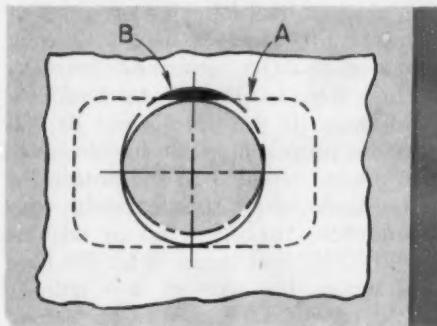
Familiarity with technique involved in machining this part would have suggested to the designer that either the hole should be smaller or the cored opening larger.
